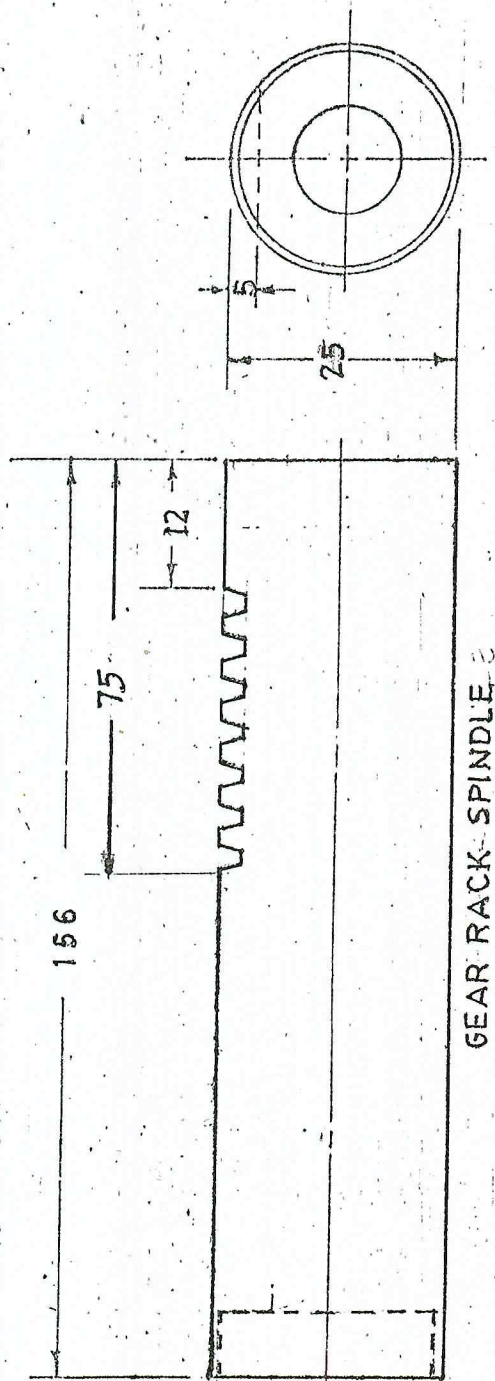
SHOWS DETAIL OF THE GEAR RACK SPINDLE
